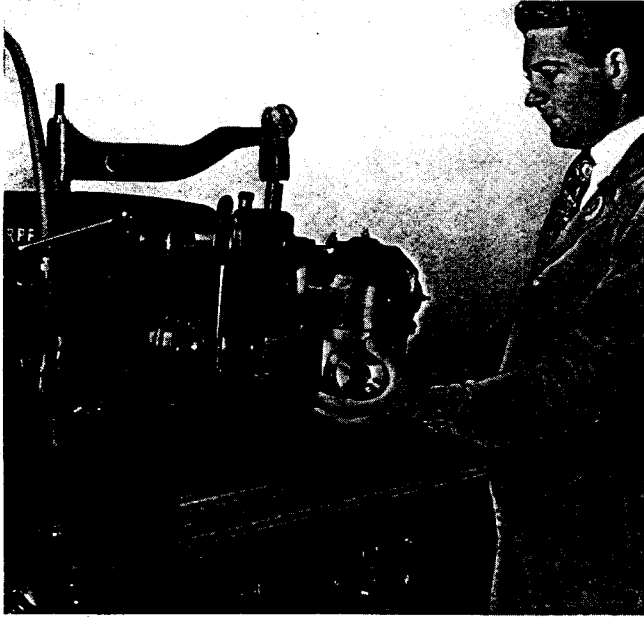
Bringing Universal Milling Attachment into working position using Attachment Crane (furnished as an extra).
